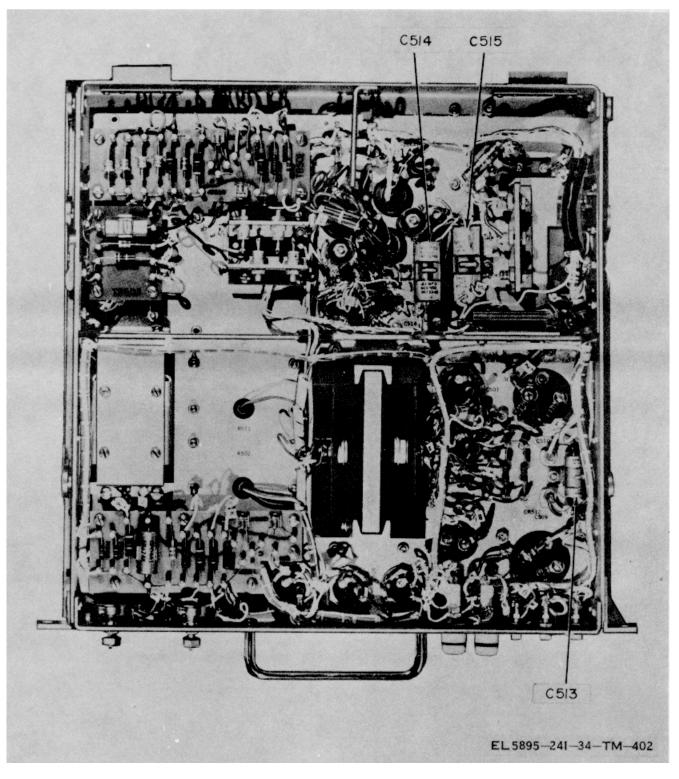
Power Supply PP-2803A/FSW-8, bottom view, added parts not on Power Supply PP-2803/FSW-8.
